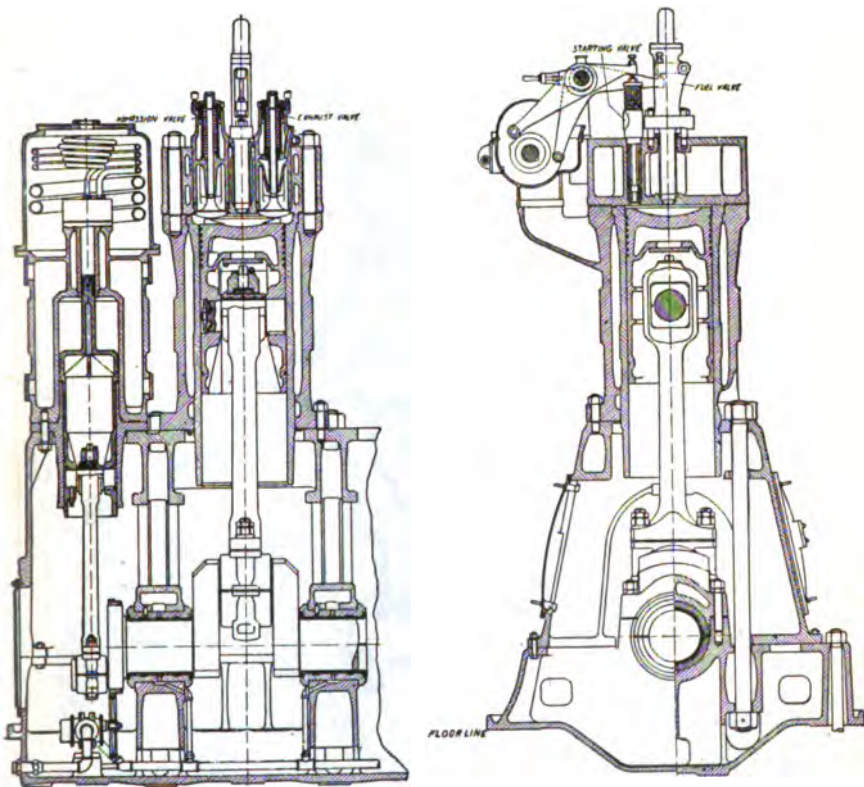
Two sectional views of Diesel engine built by Busch-Sulzer Bros. Diesel Engine Co.
